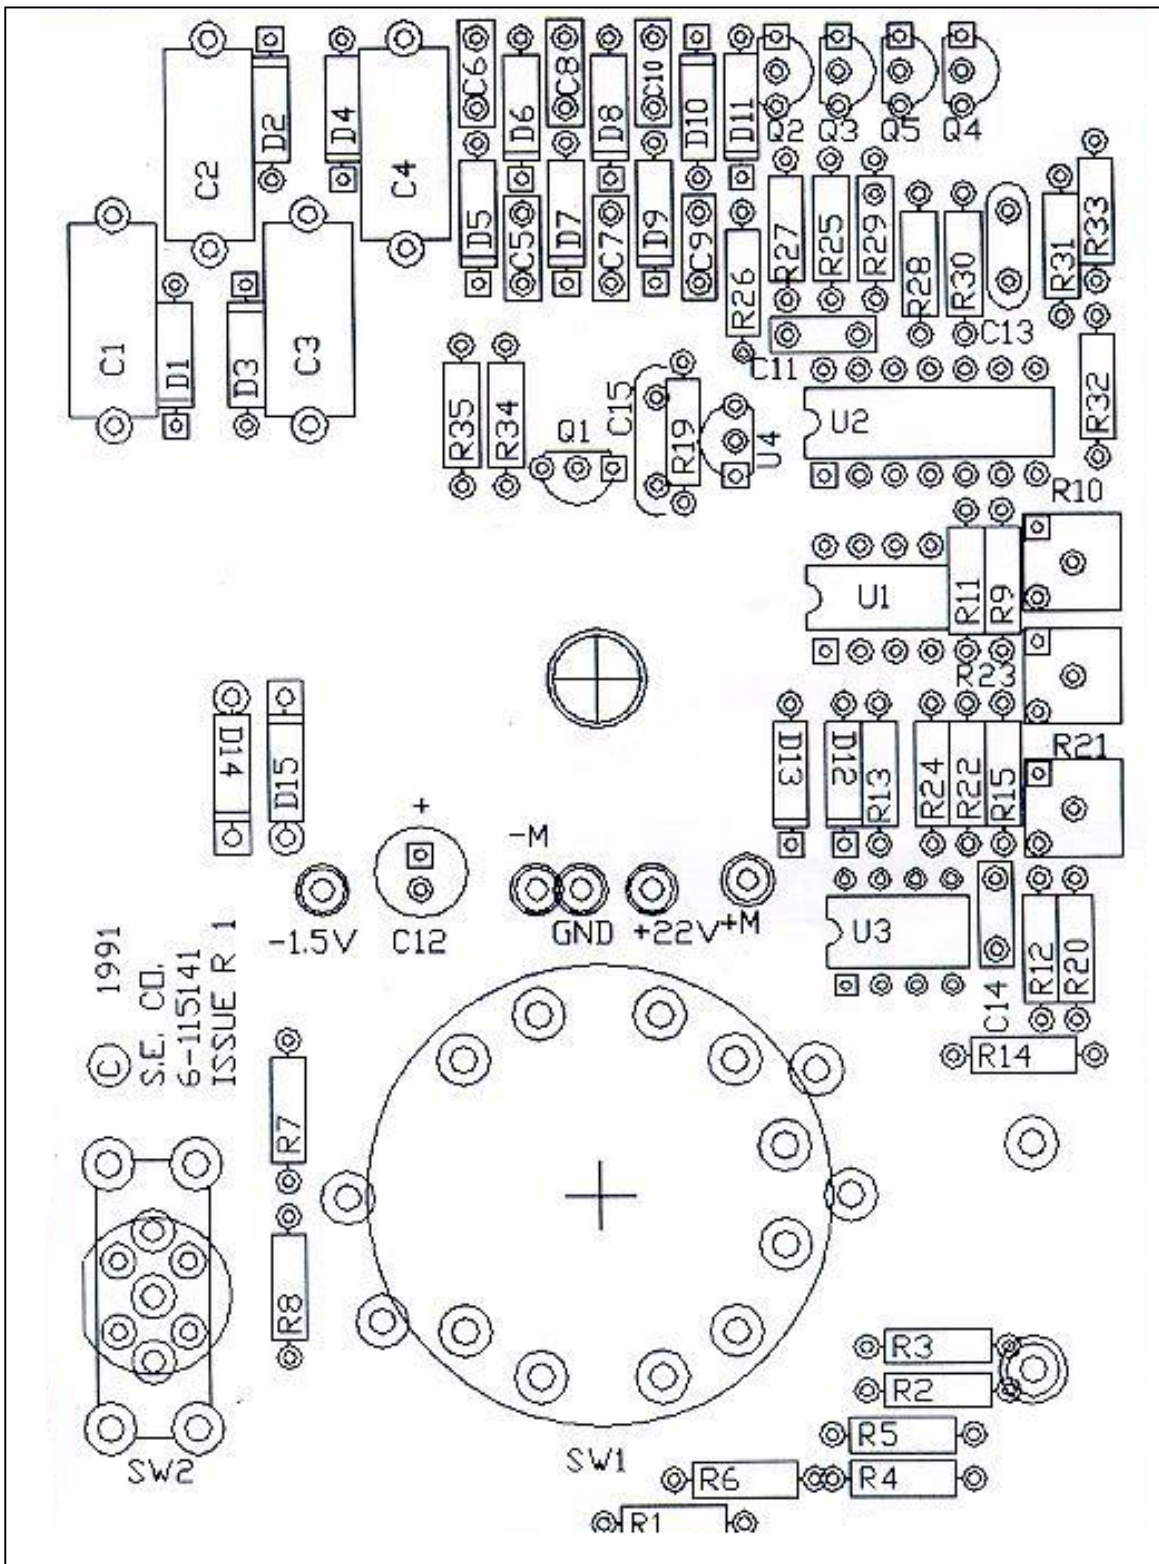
Main PC Board Assembly - Model T00456 3M 701 (Issue 1)
